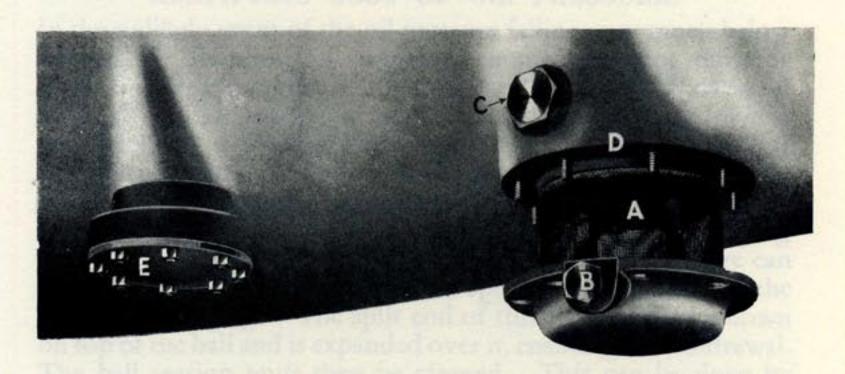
BASE OF SUMP, SHEWING OIL PUMP STRAINER PARTLY REMOVED.
